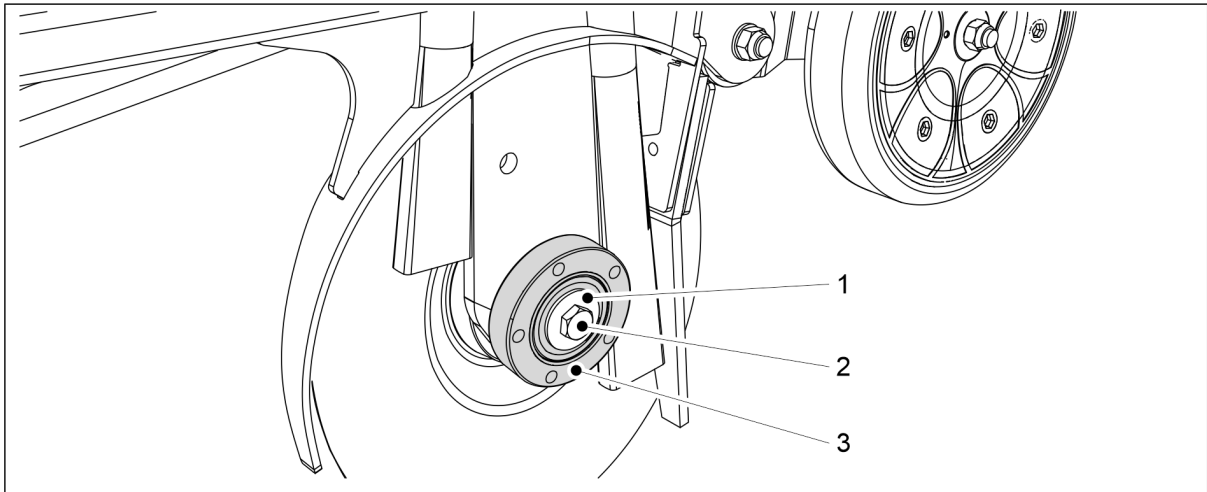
303. Detaching the bearing housing
